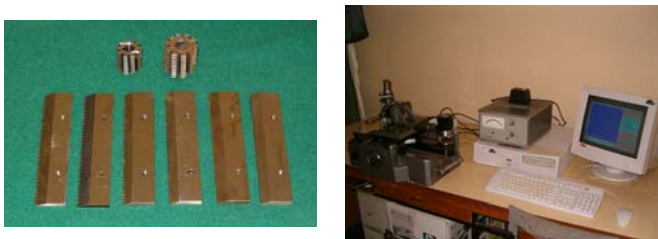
Modified device for one-profile checking of tooth gears with asymmetric tooth profile
